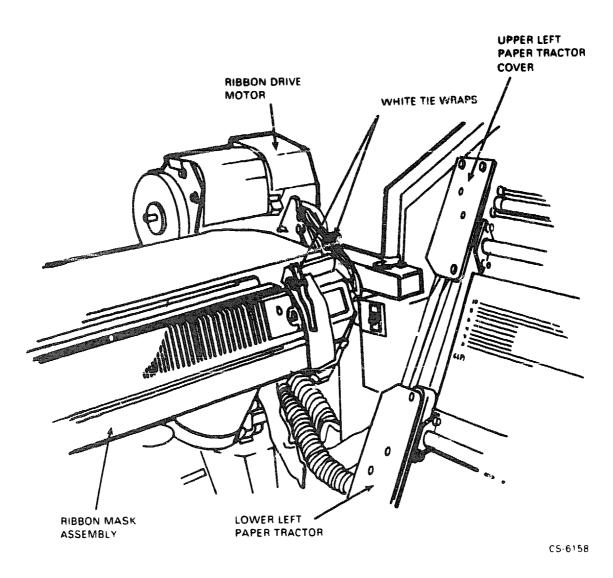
Location of White Tie Wraps on Band Gate Door Assembly (Hinge Side, Door Open)
